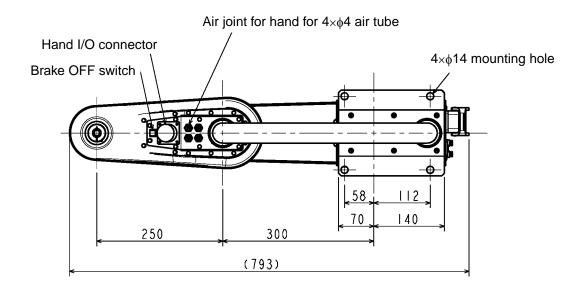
Outer dimensions of the robot (TH550A-T)
